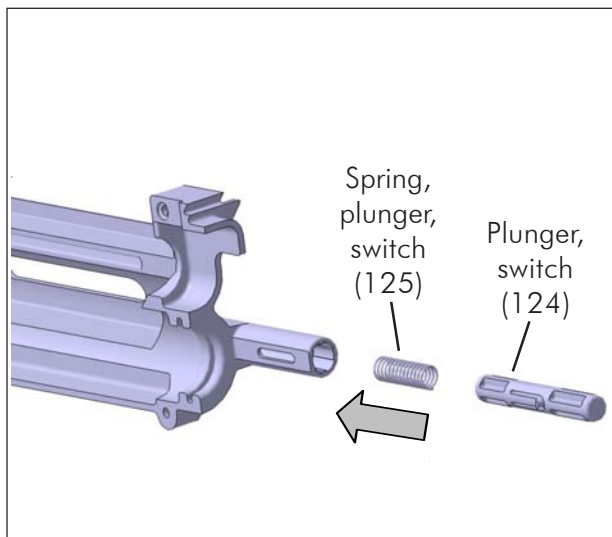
af - Reassembly of the plunger, switch (124)
